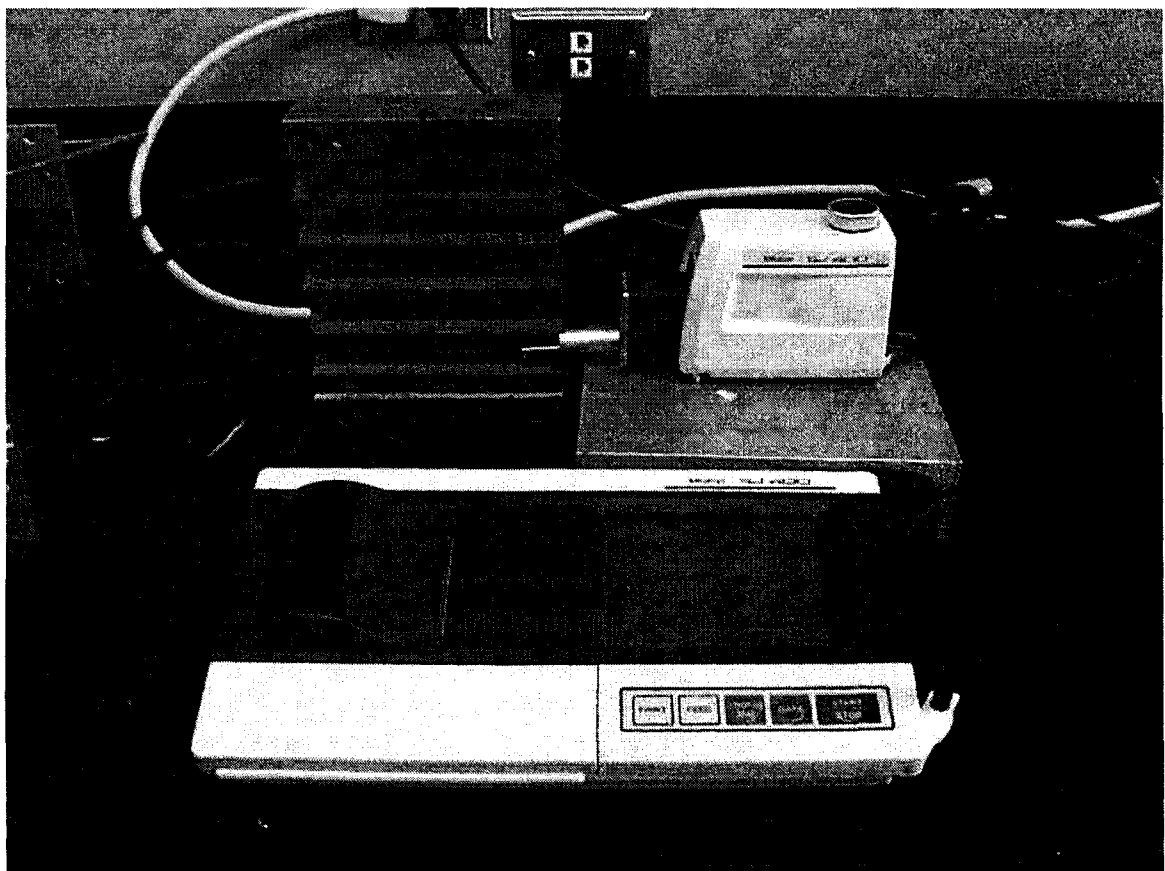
Mitutoyo Surface roughness tester with probe and work-piece setup
